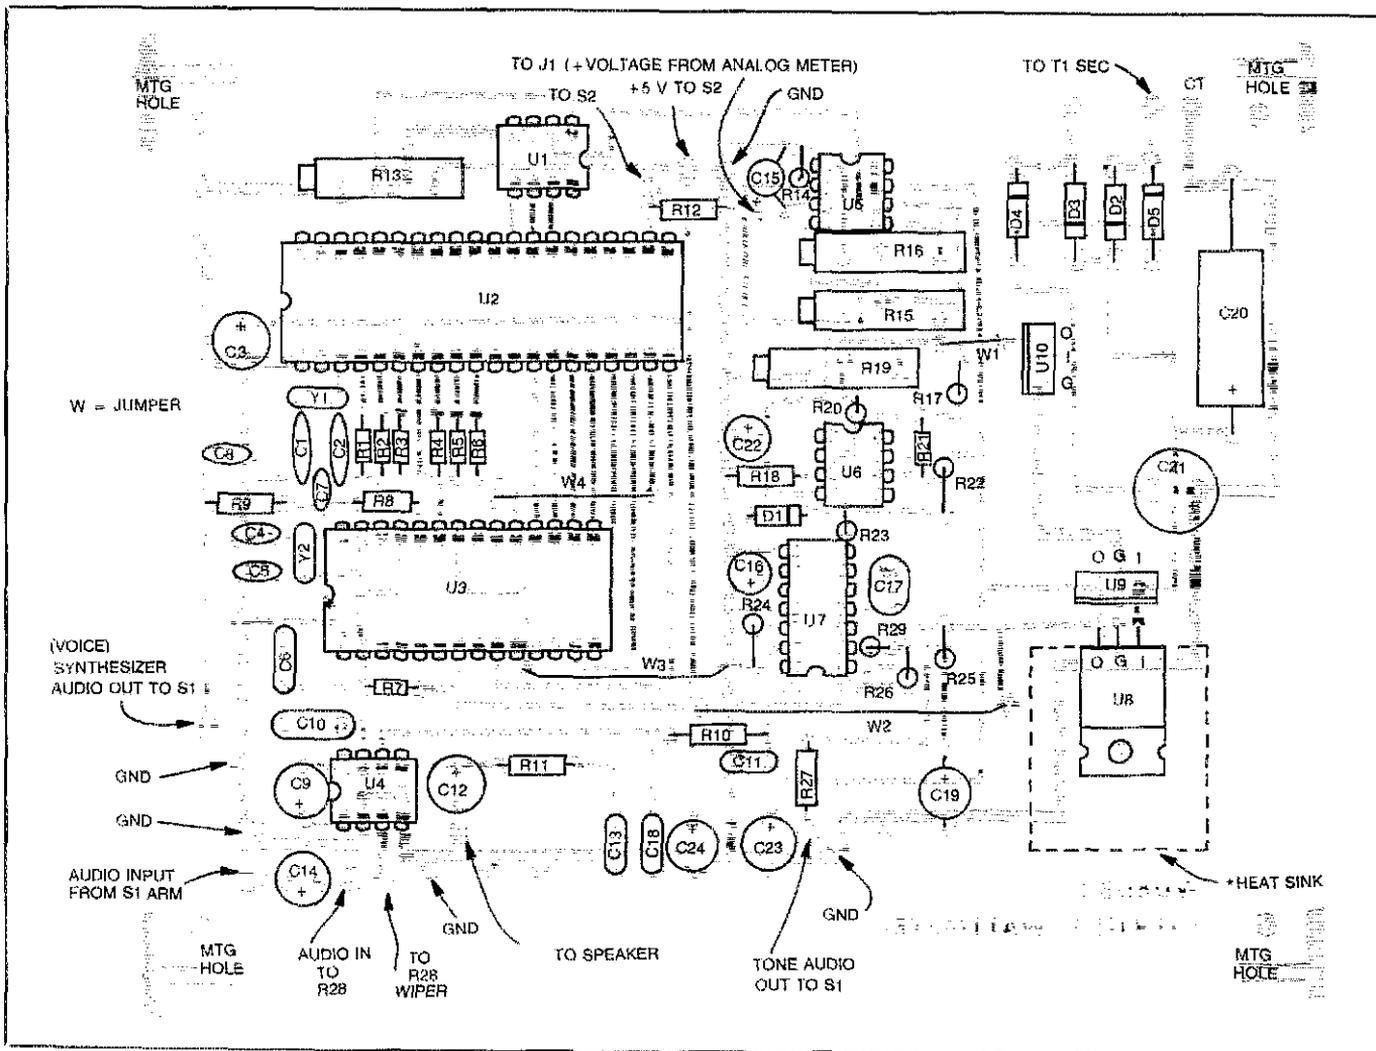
Parts-placement guide for the Orator. Parts are placed on the nonfoil side of the board; the shaded area represents an X-ray view of the copper pattern.
